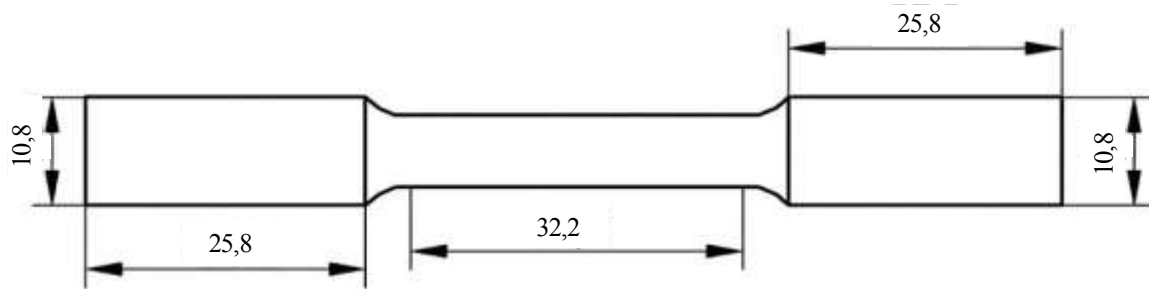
A 5 mm Thick Specimen Dimension Used For Testing ASTM-D638
